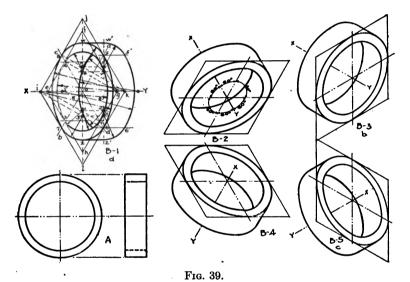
illustrates the drawing of a ring which is rectangular in section. Drawing A is a mechanical drawing and drawings B-1, B-2, B-3, B-4, and B-5 are isometric drawings. The several isometric drawings are given to illustrate the choice of view or position of the object open to the draughtsmen.
